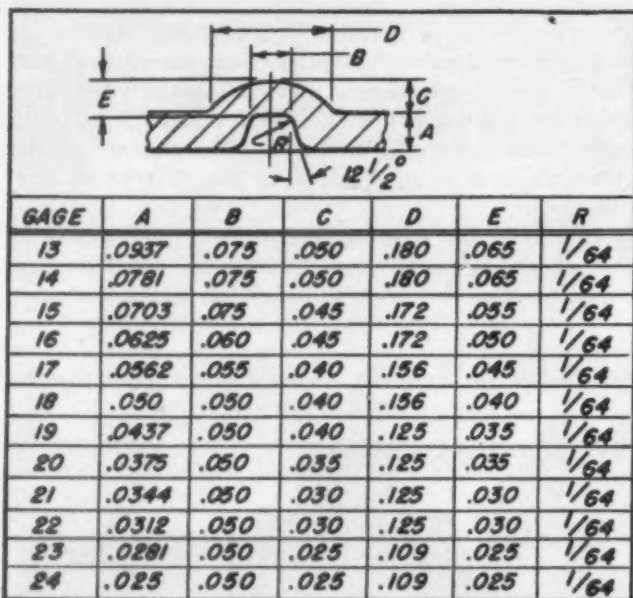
Above—Design of button projections usually used for embossing or stamping into 13 to 24-gage stock
